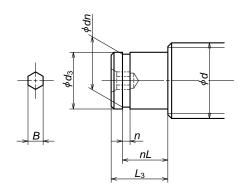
Shaft end configuration of R Series (opposite to the drive side)
